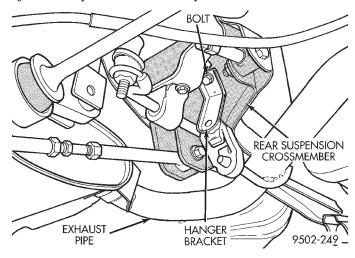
Exhaust Pipe Hanger At Rear Suspension Crossmember
